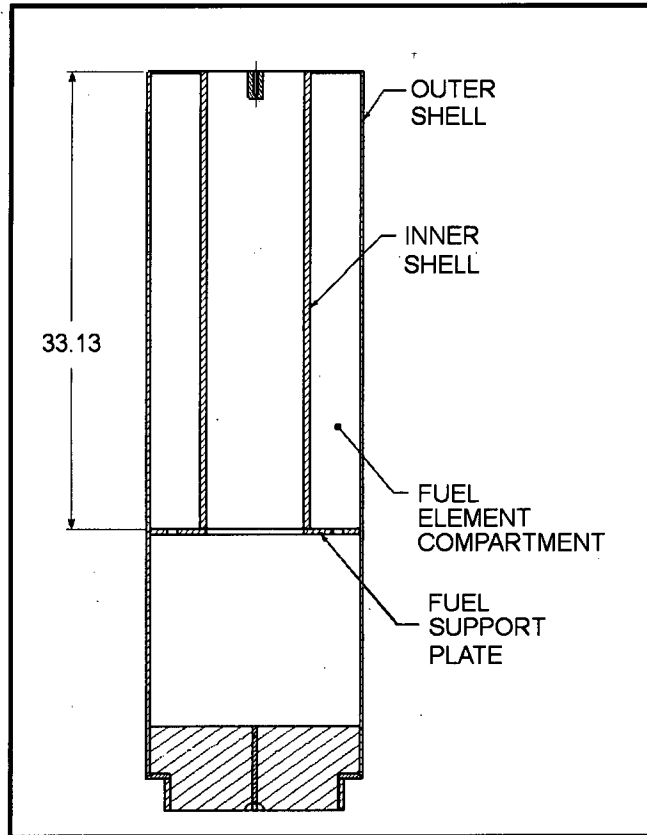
MURR Fuel Basket Cross Section
